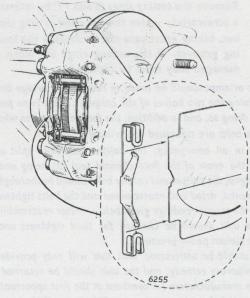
Series I and II models. The illustration shows the pad retaining pins passing through the slotted ends of the anti-rattle springs and the tongues bearing against the pad backing plates. The inset shows the outward end of the anti-squeal shim cut off to accommodate the anti-rattle spring, when both are fitted to the same caliber.
